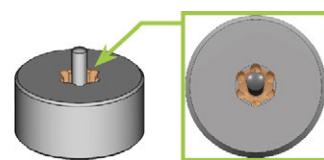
RECESS IN KNULED NUT (MARKED ORANGE)
